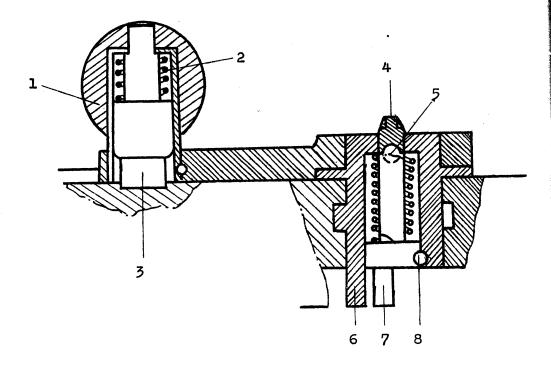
RECOCKING HANDLE ASSEMBLY
